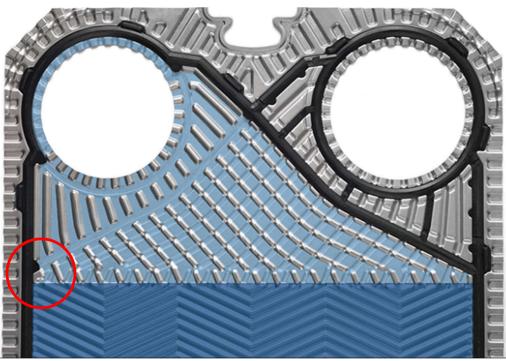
Cassette and gasket identifying location of both weld defects.
